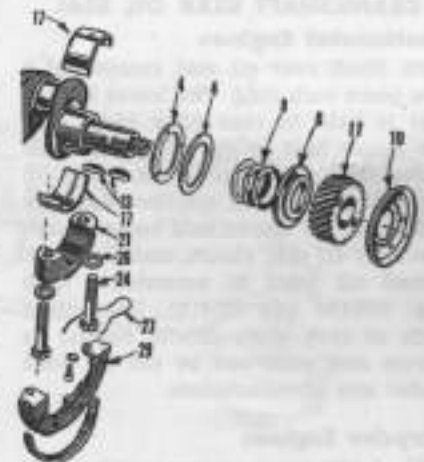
Continental engine crankshaft, front main bearing and seal.
